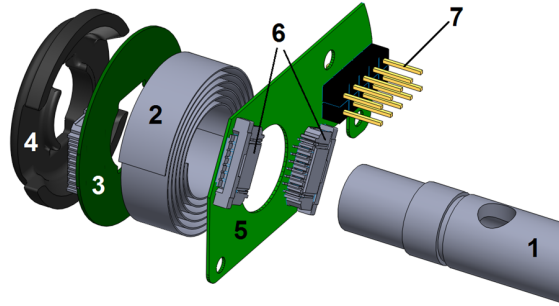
Split view of the rotation contact: (1) robot axis, (2) flexprint, (3) axis PCB, (4) guide, (5) body PCB, (6) flexprint connector, (7) body connector.
